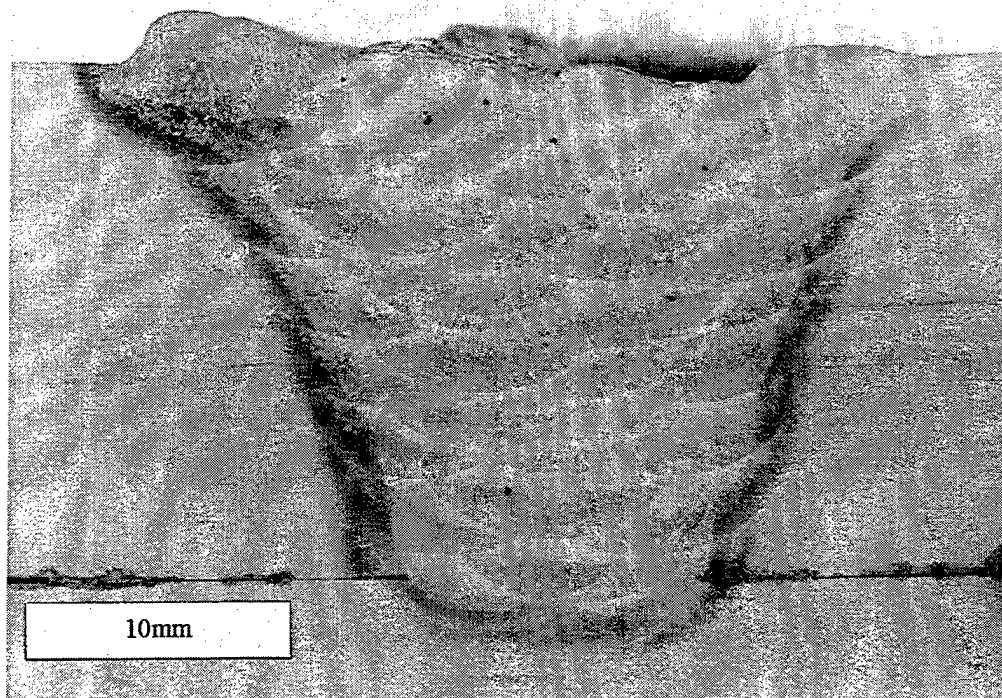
Macro photograph of UWW25 weld sample – Underbead cracks cannot be seen at this magnification
